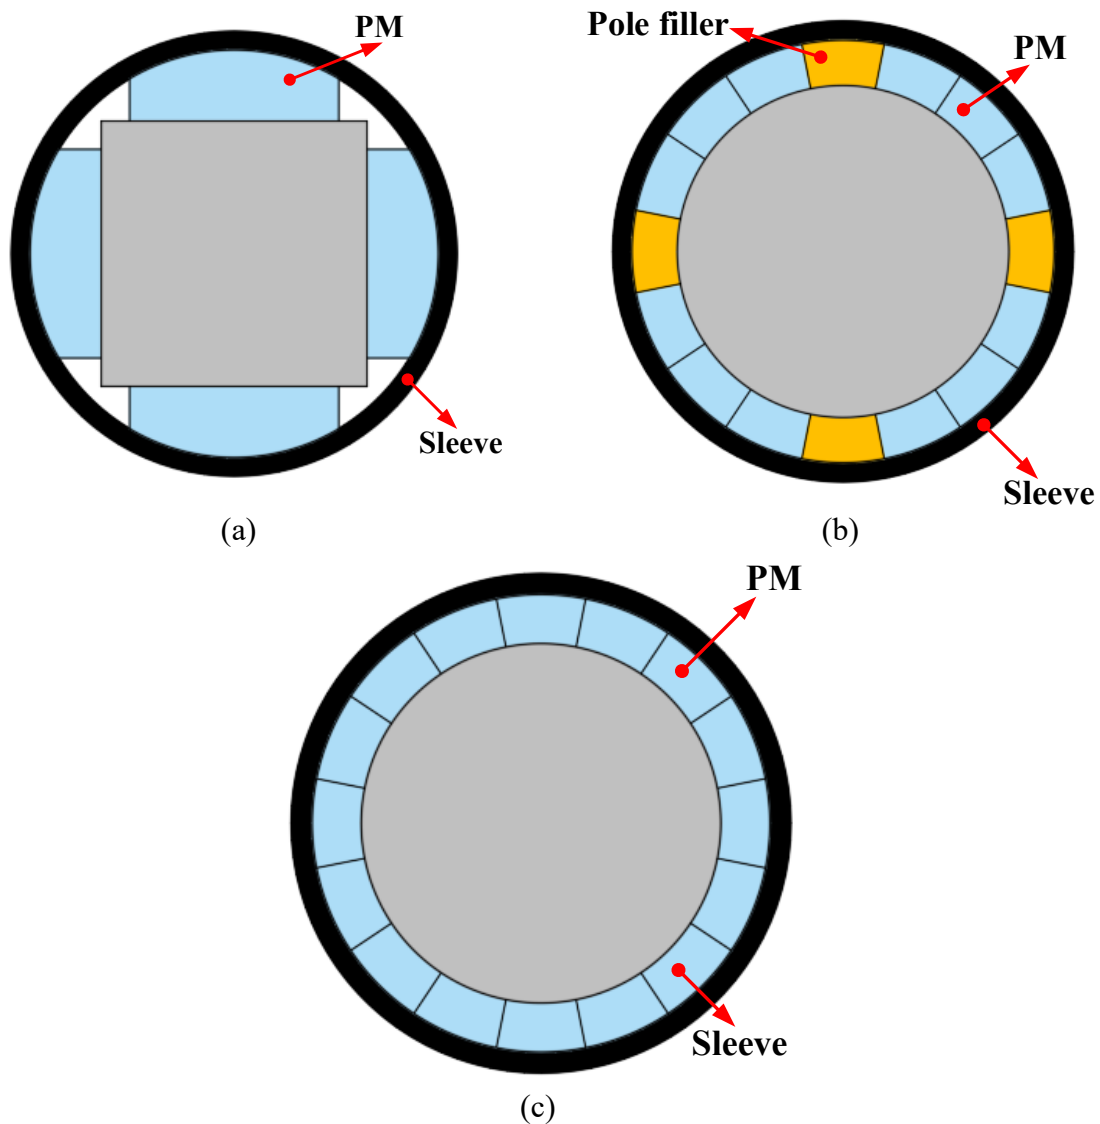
Rotor configurations for 4-pole high-speed SPM machines. (a) Broad-loaf magnets type. (b) Segmented magnets with inter-pole filler. (c) Halbach magnetized magnets.
